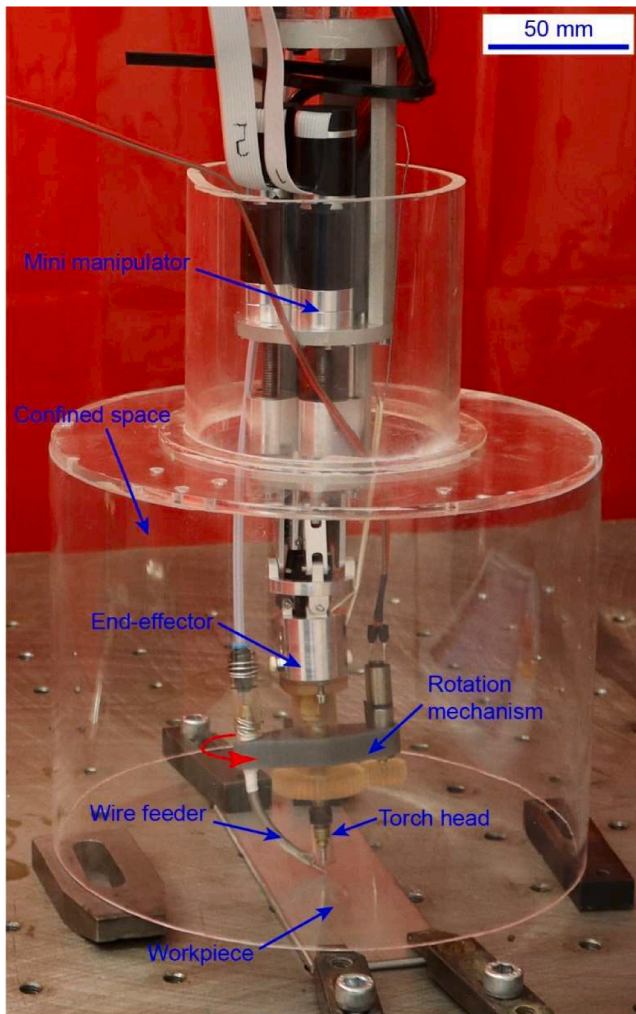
Welding tests in confined pipe environments by using the proposed macro-mini manipulator system to follow a circle path on a horizontal surface.
